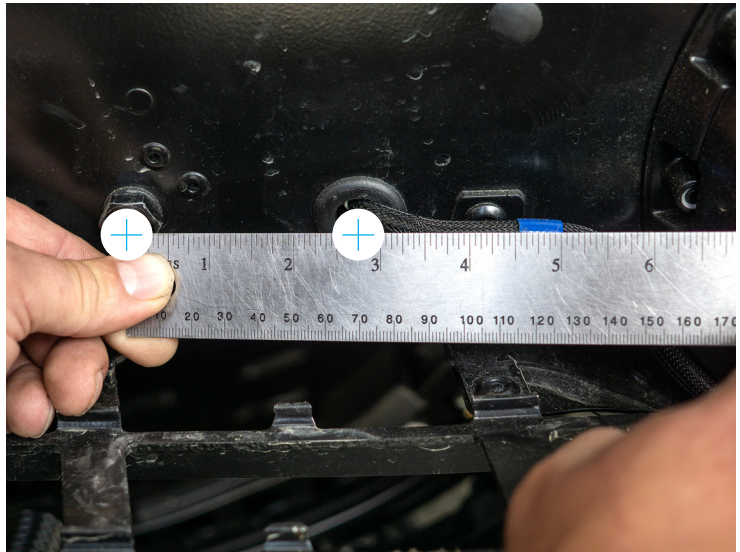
Front torque arm mounting bolt (left), first mark for drill hole (right)
